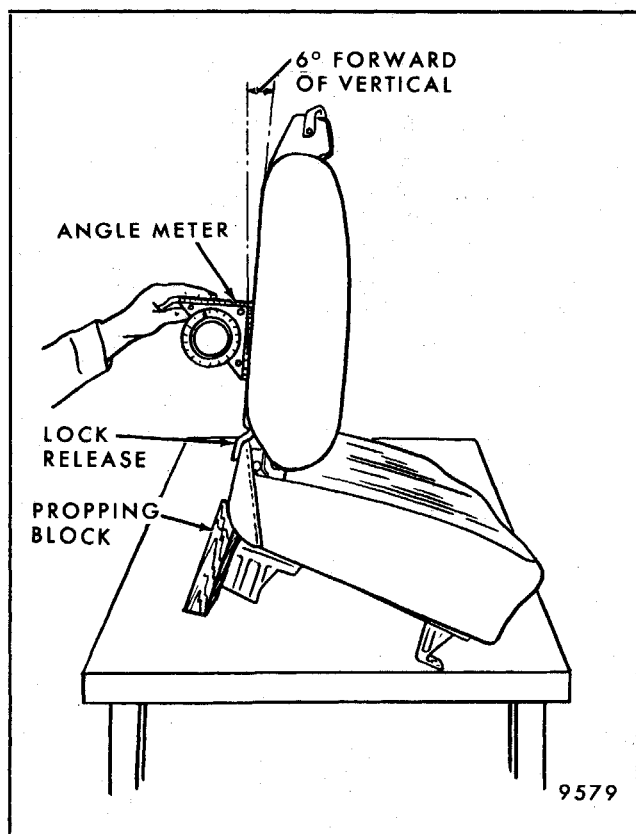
Front Seat Back Inertia Lock Check - Out of Vehicle
